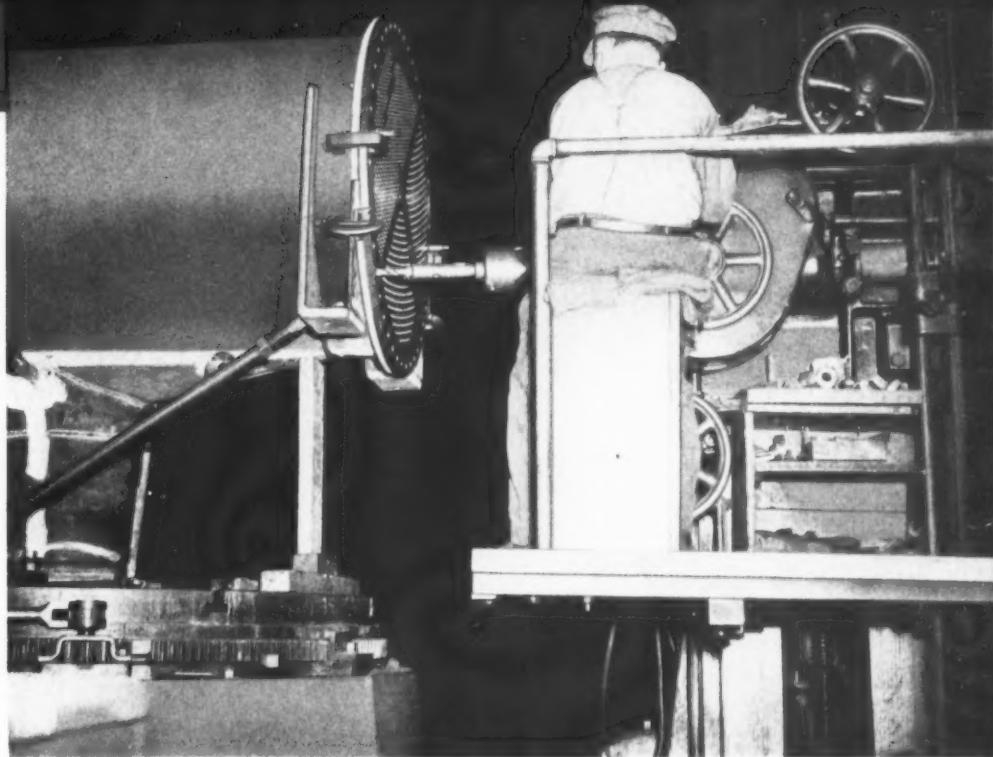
Face-milling a Fabricated Steel Structure on a Huge Boring Mill that is Provided with an 8-inch Diameter Spindle
